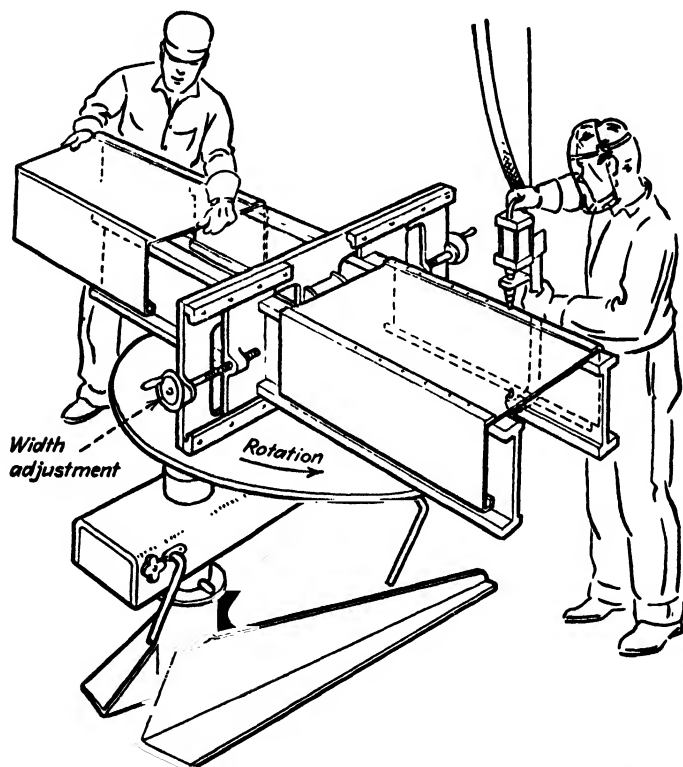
Various width cabinets are welded on this pedestal type jig with hand wheel adjustments.
